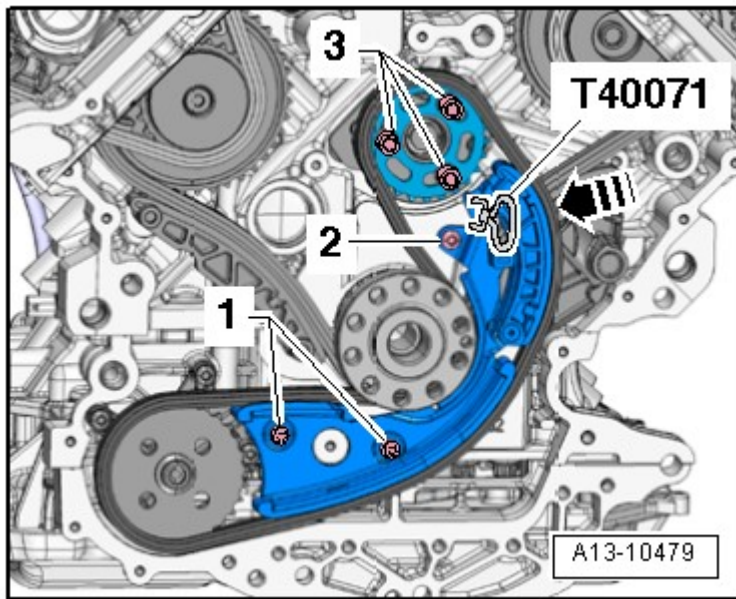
Pressing Chain Tensioner Guide Rail And Securing Chain Tensioner Using Locking Pin T40071
